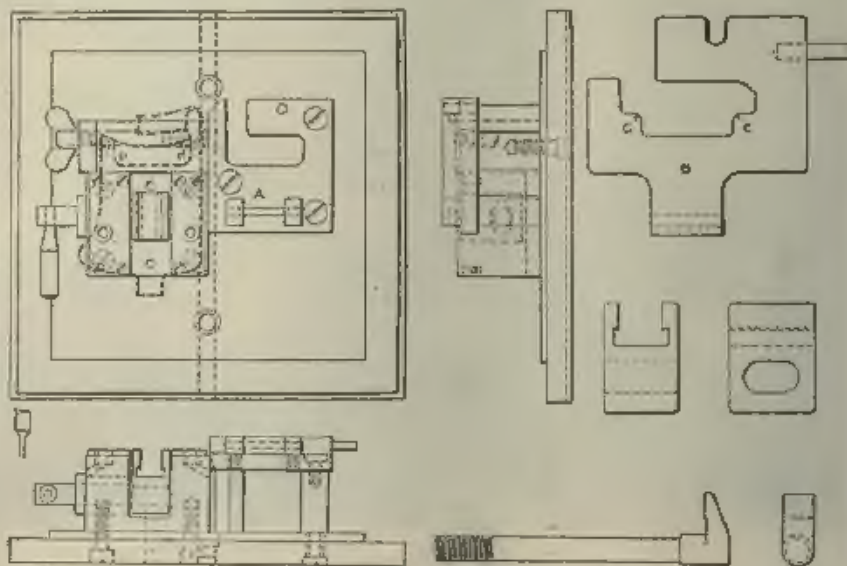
DETAILS OF FIXTURE IN FIG. 78.
